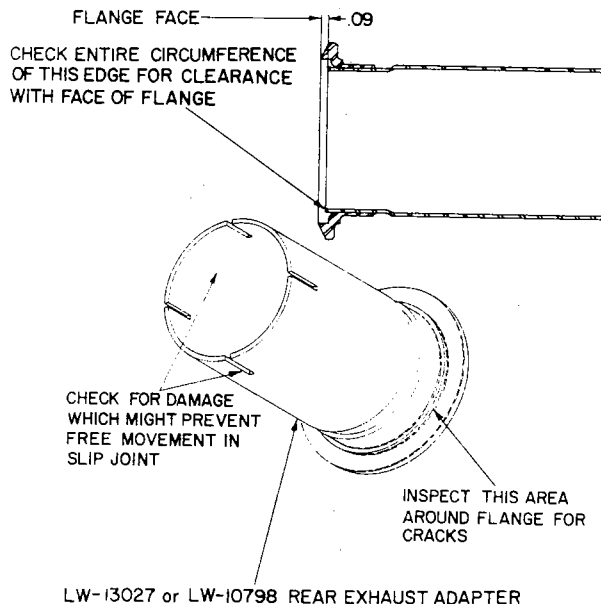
Exhaust Adapter Pipe Showing Areas Requiring Inspection
